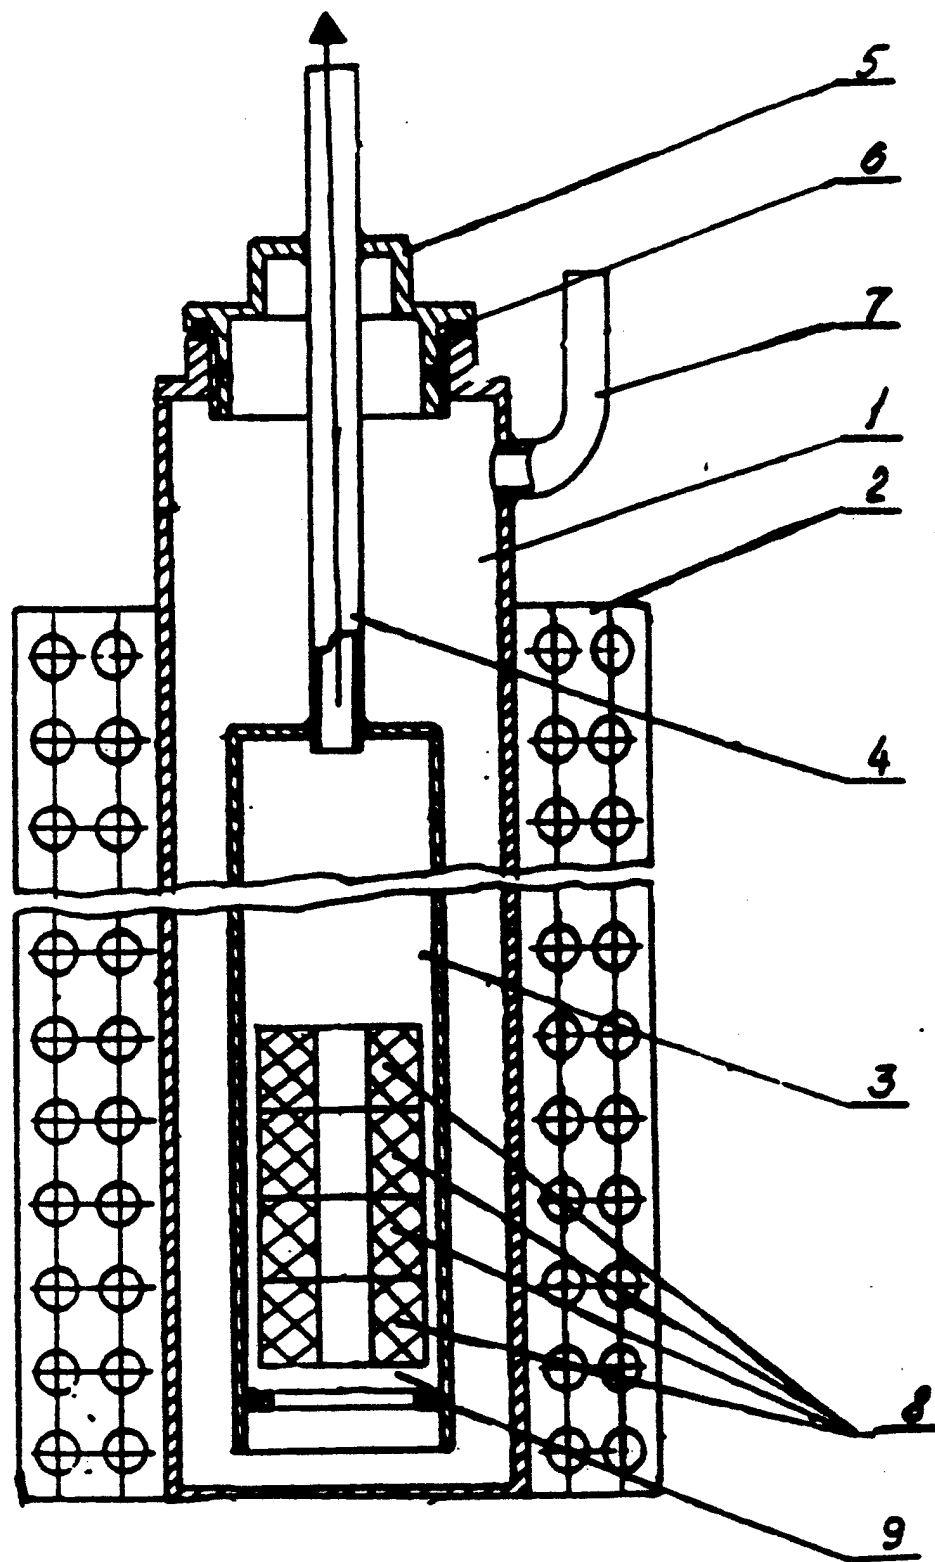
Reactor Components - (1) cylindrical body (2) cooling fins (3) inner cylinder (4) gas exit tube (5) threaded lid (6) gasket (7) water inlet tube (8) hydride pellets (9) pellet support
